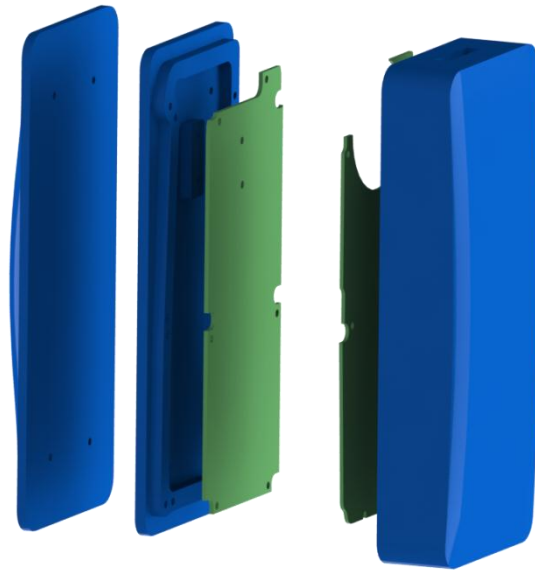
Geometry of simplified radio (left to right), battery, chassis, RF board, MMI board and front panel
